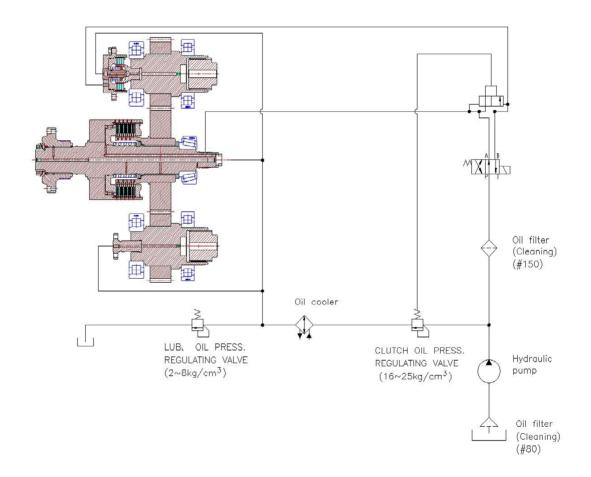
PTO main body/control box that solenoid valve is installed
